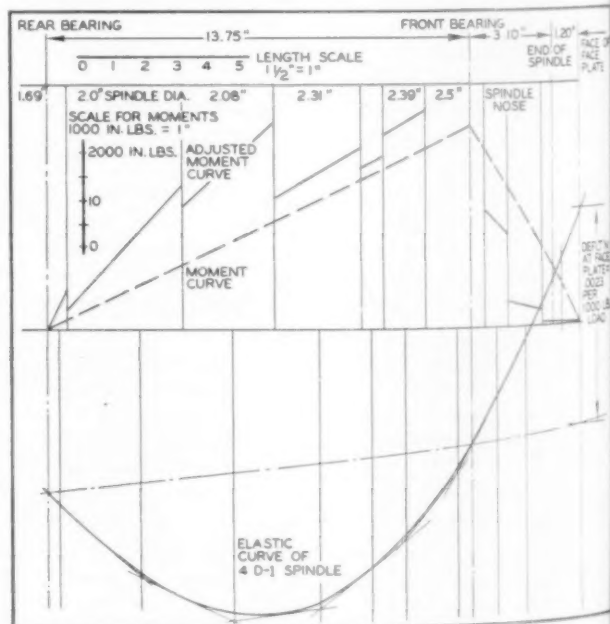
Deflection diagram for 4 in. D_1 Spindle, with two radial bearings.
